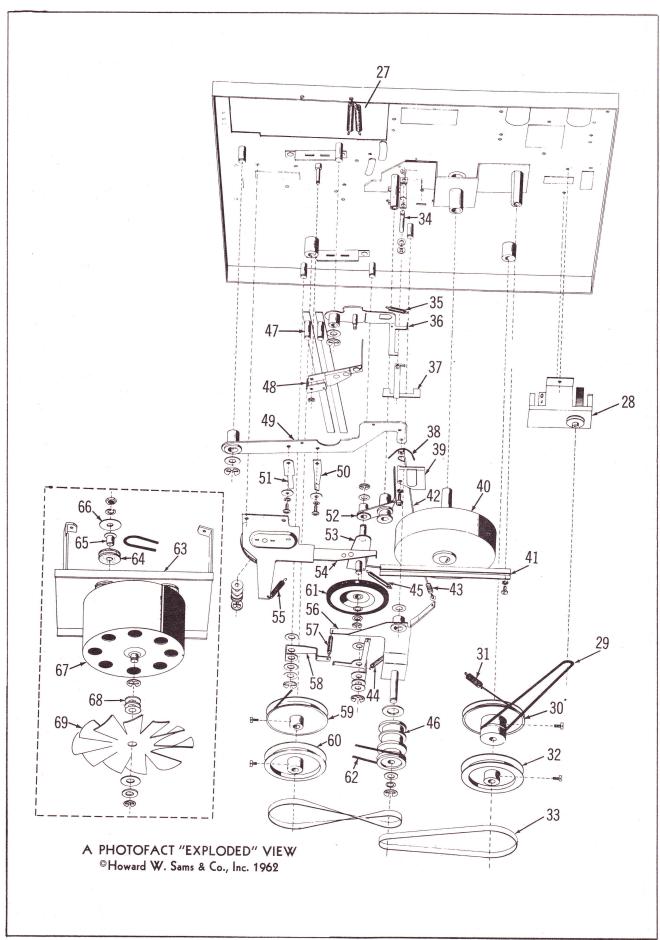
C EXPLODED VIEW OF PARTS BELOW MOTOR BOARD
